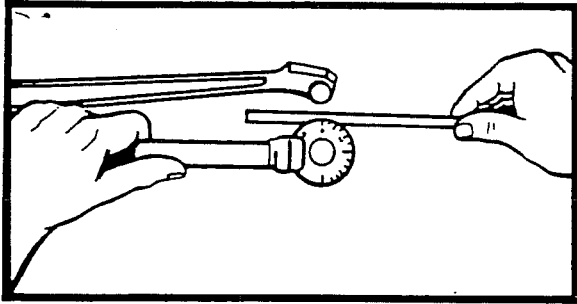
When placing tube in bender, raise the right handle of bender as far as it will go so that it rests in a horizontal position as shown. Raise the clip and drop the tube in the space between the handle slide block and the bending form.
